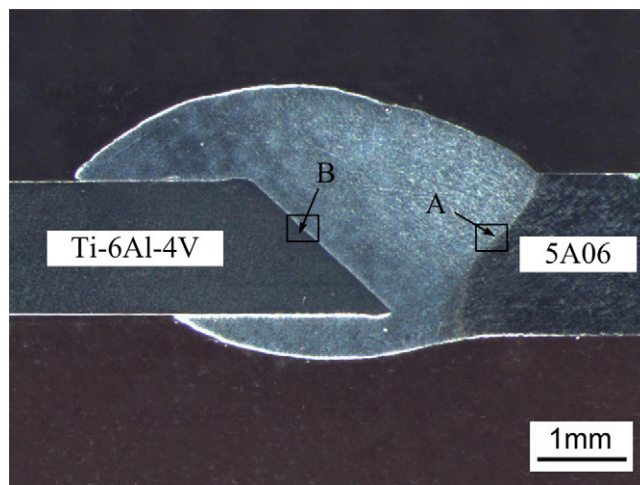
Macroscopic cross section of the joint by laser welding–brazing.
